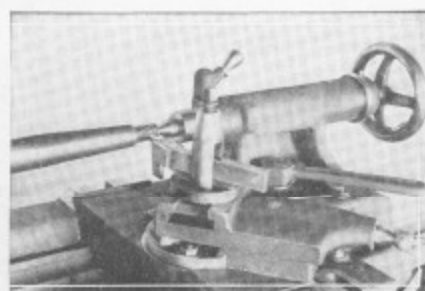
Cutting a Screw Thread on an Axle. Screw Thread Range of Lathe, 4 to 96 per inch.
